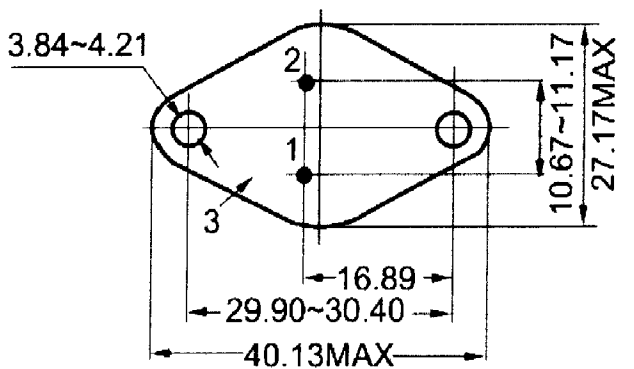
outline dimensions (unindicated tolerance:±0.1mm)
